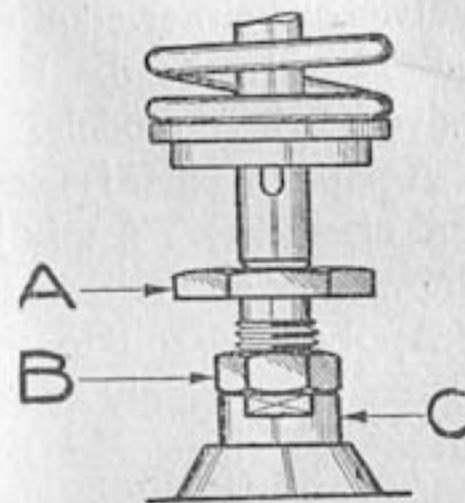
SIDE-VALVE TAPPET ADJUSTMENT.
